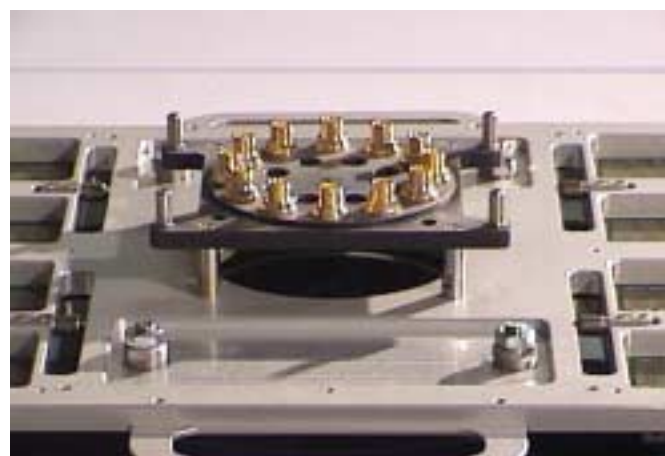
Precision RF blindmate connector assembly used for ease of docking (courtesy of Agilent Technologies)
